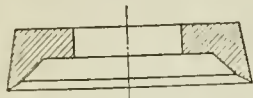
EXPERIMENTAL ROTARY LATHE TOOL
